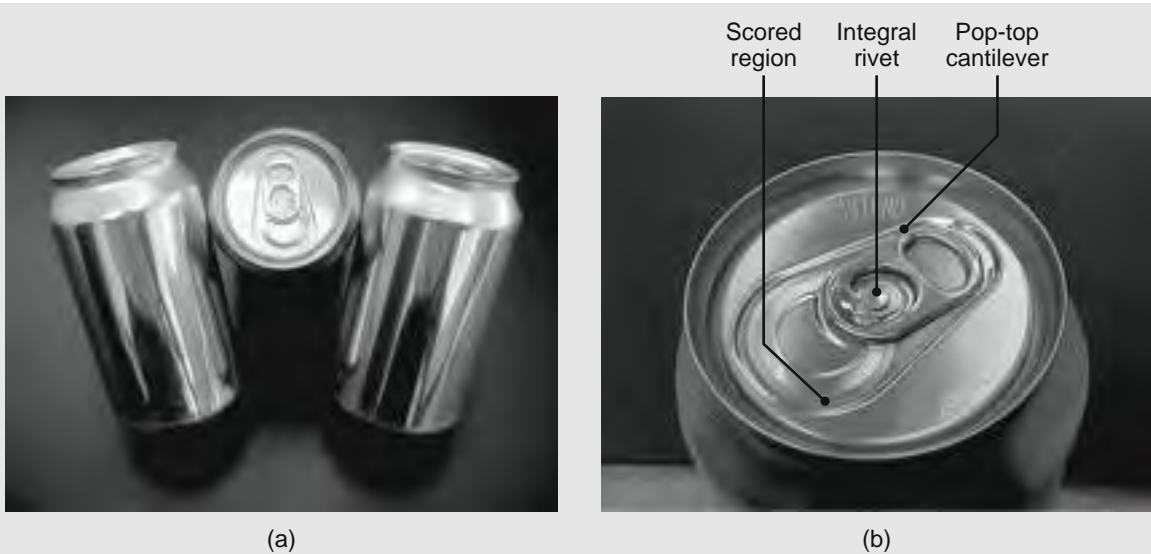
(a) Aluminum beverage cans. Note the excellent surface finish. (b) Detail of the can lid, showing the integral rivet and scored edges for the pop-top.
